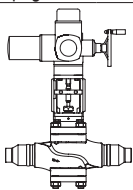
with butt weld ends and Pressure balanced plug
